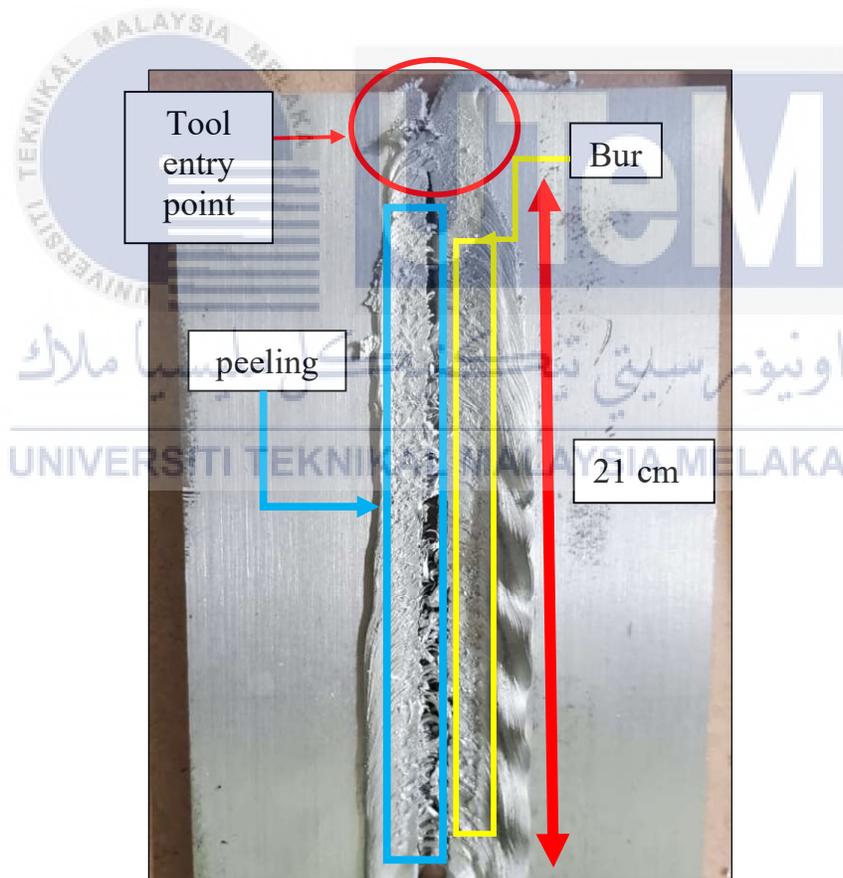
Welded aluminium plate at 800 RPM at 150mm/min
